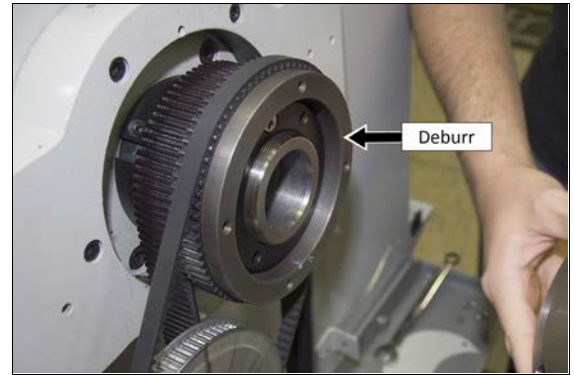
Face of the spindle pulley on the left side of the machine.
